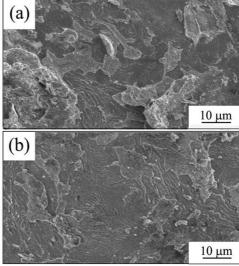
Fractured surfaces of the welded joints at interlayer thickness of (a) 30 μm (b) 50 μm
